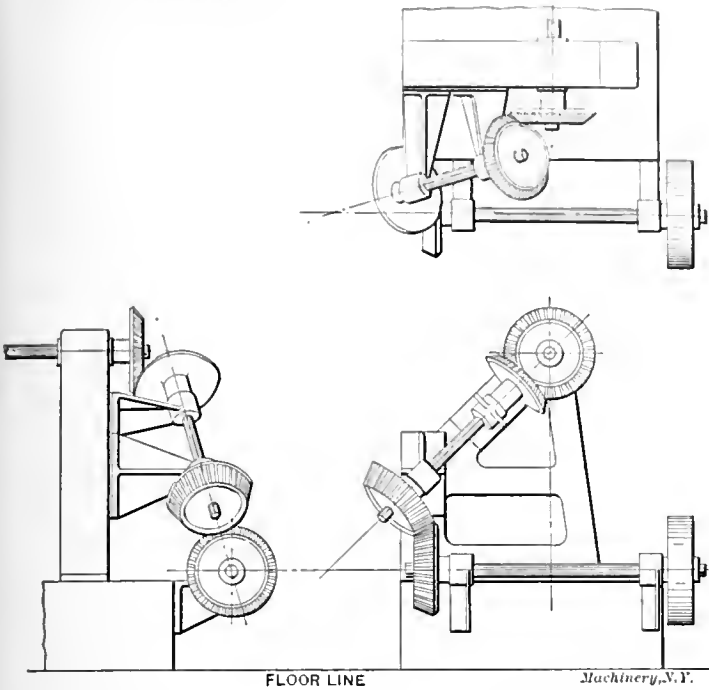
Arrangement of Bevel Gearing with a "Double" Diagonal Shaft.
